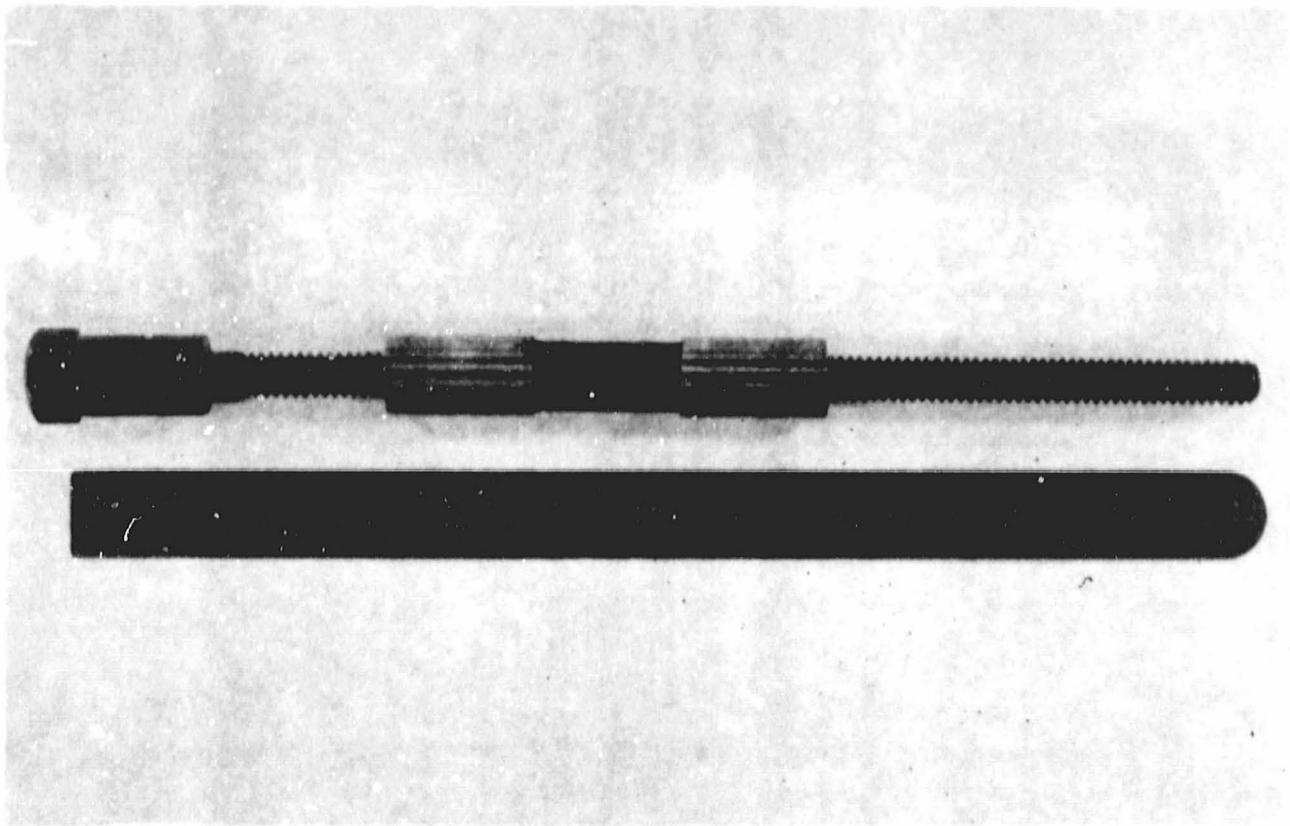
Double Ended Bond Joint Pull Test Specimen.
